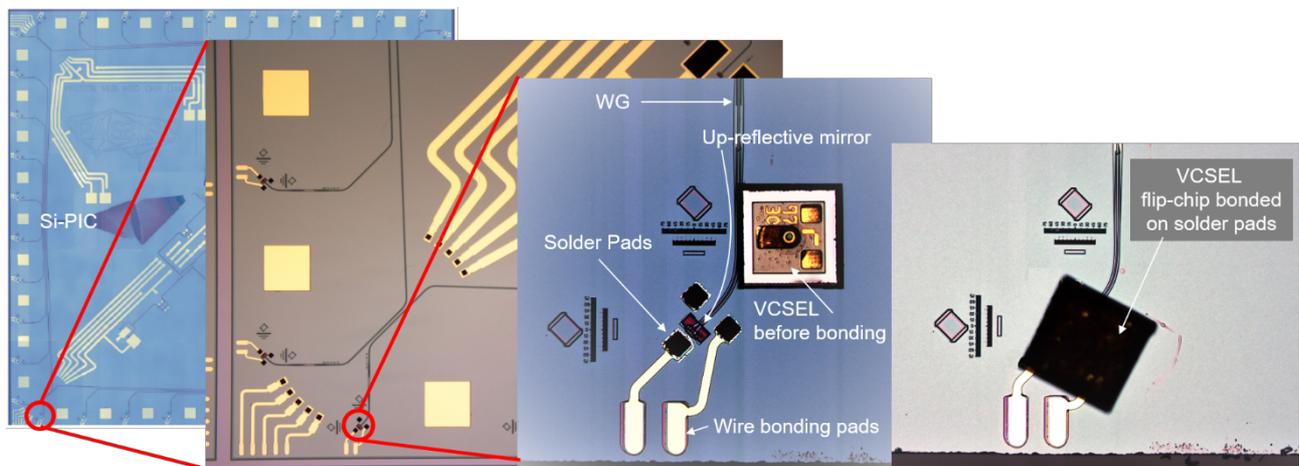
VCSEL Flip Chip bond on Up Reflective mirror and solder pads
